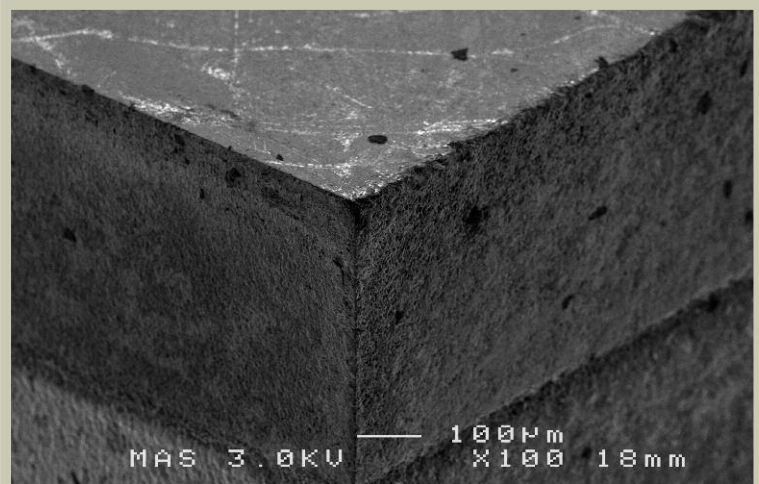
Laser MicroJet cutting is perfect for tool machining. It normally takes just a few minutes to cut a tool insert
